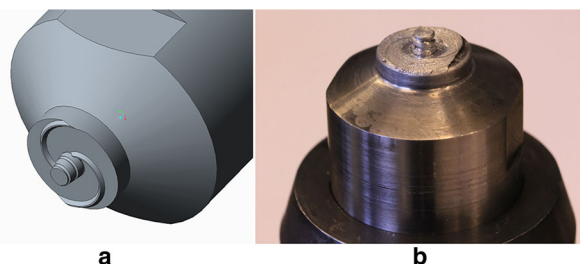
FSW tool implemented to produce the free-shape hollow box profiles. a Schematic representation of the shoulder and probe features. b Photo of the tool as extracted from the weld
